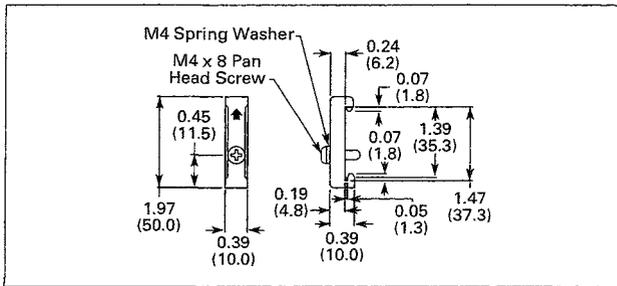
PFP-M DIN Rail End Stop — Approximate Dimensions in Inches (mm)
